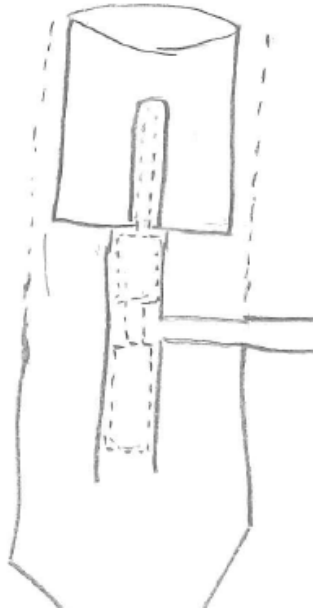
Sketch of the produced fill valve Figure 3.15: 3D-model of the produced fill valve
